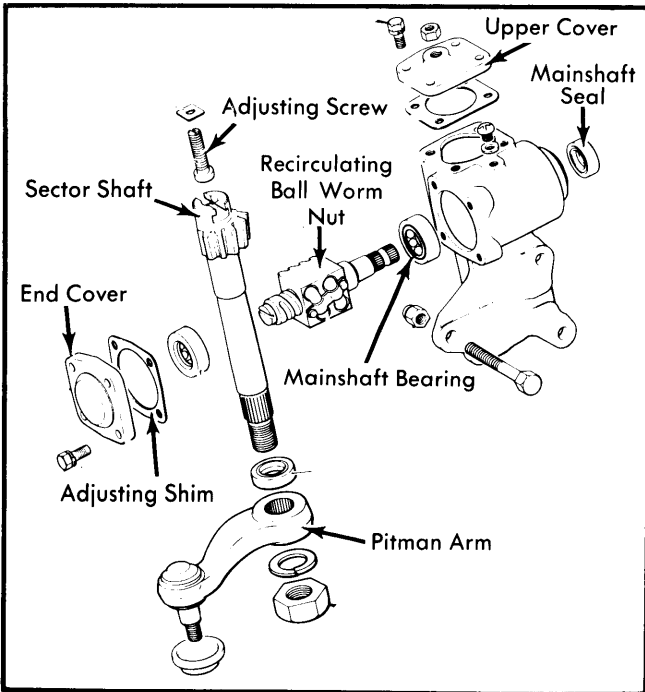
Exploded View of Recirculating Ball & Nut Steering Gear — Small Gear Box
